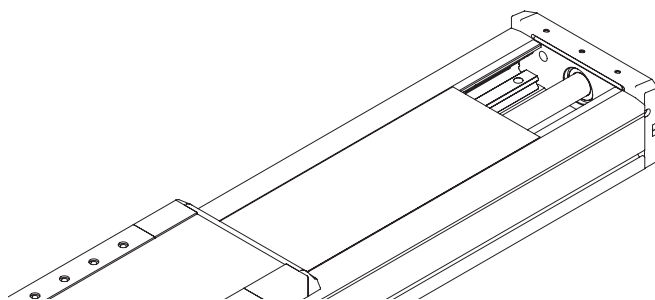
Mounting the cover strip under the cover strip clamp
